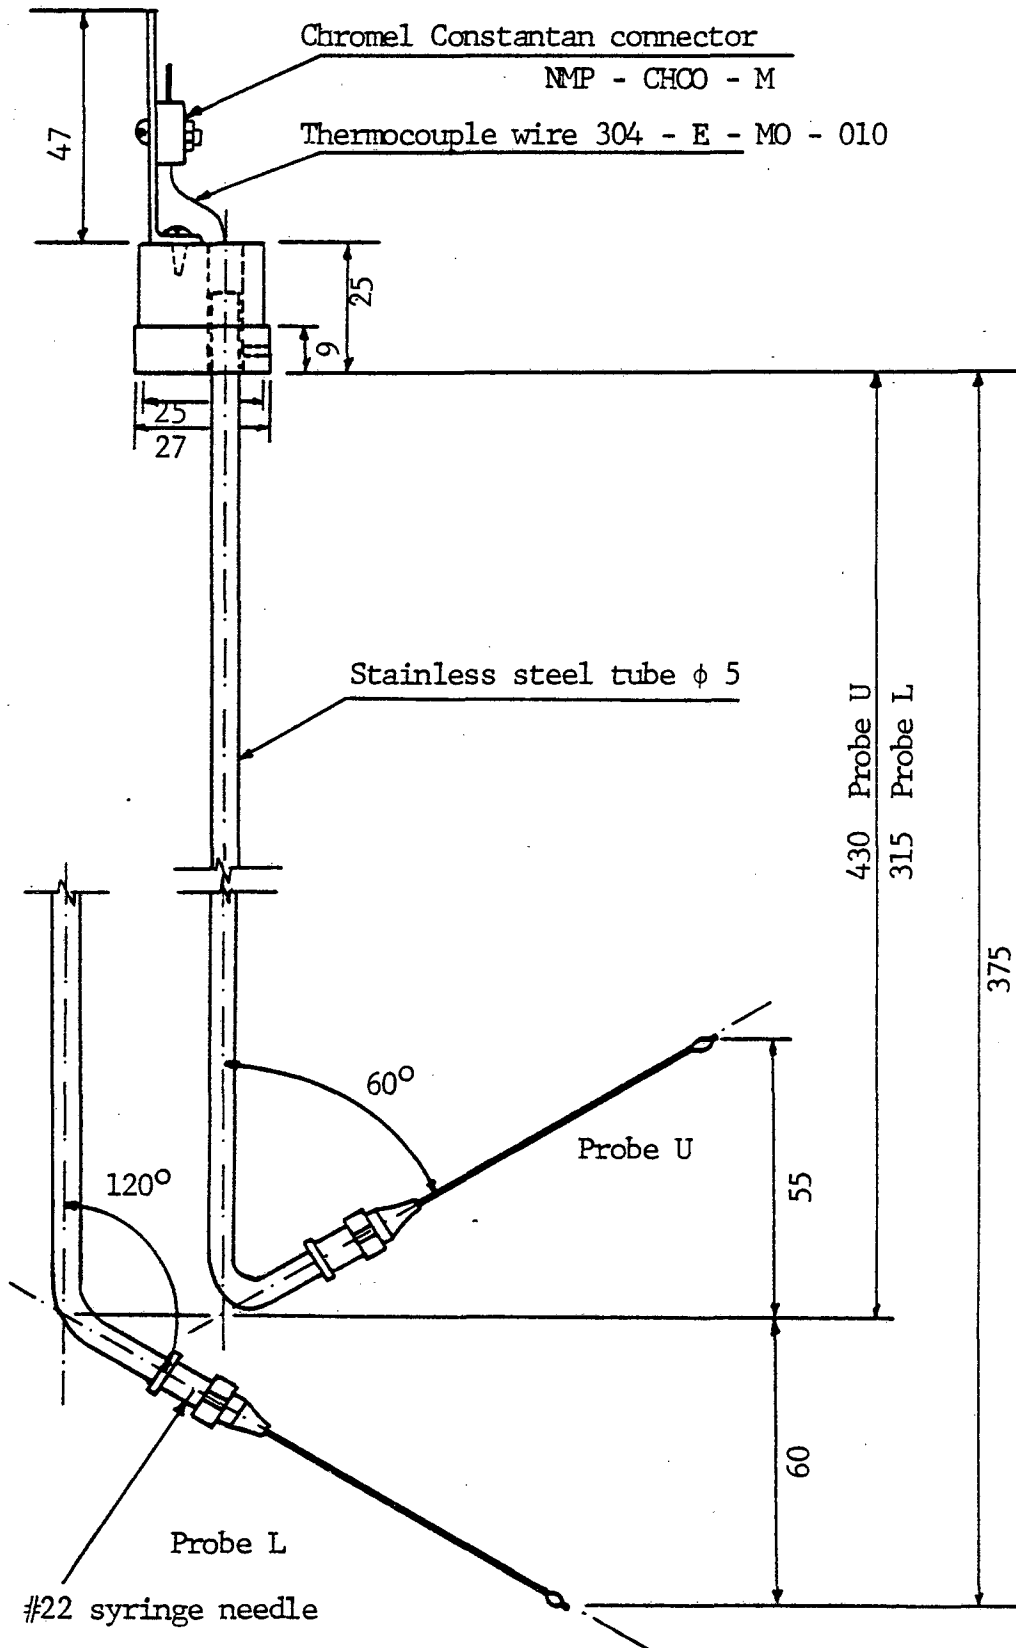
Thermocouple probes. Dimensions in mm.
